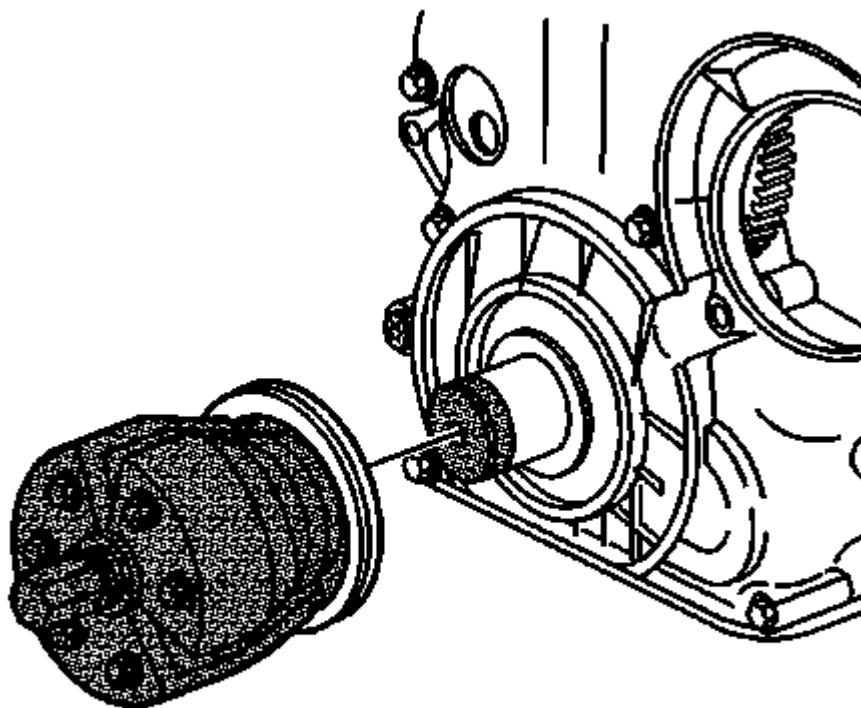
Removing Crankshaft Front Oil Seal Using J 44644
